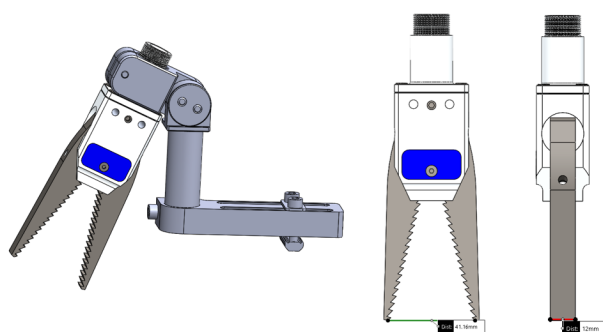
Gripper assembly and dimensions, Part# GRZ-20-20-SL (*Emicorp.com. EOAT Parts — EMI, n.d.*).
